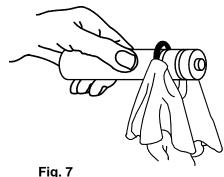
O-Ring Removal 9. Remove the dasher assembly (Fig. 8) being careful not to damage the scraper blades, then disassemble in the following manner:
